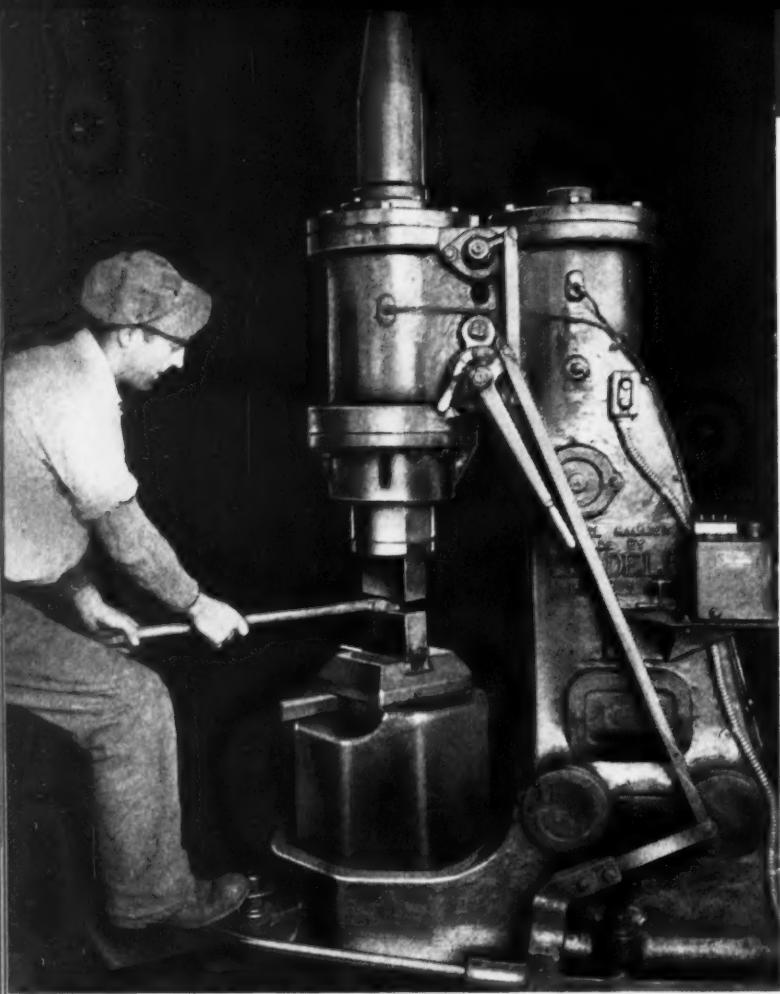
Simple Forging Operation Performed by an Air Hammer that has a Capacity for Working Mild Steel up to 3 Inches Square
